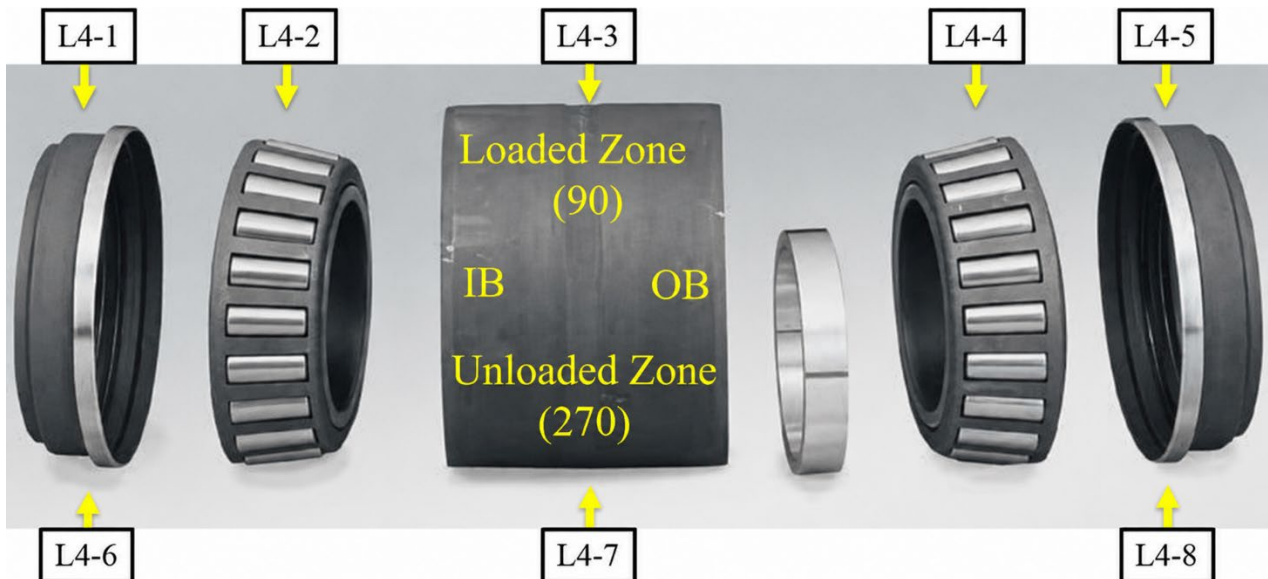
Exploded view of tapered roller bearing with grease sampling labels (Left Bearing on Axle 4)
